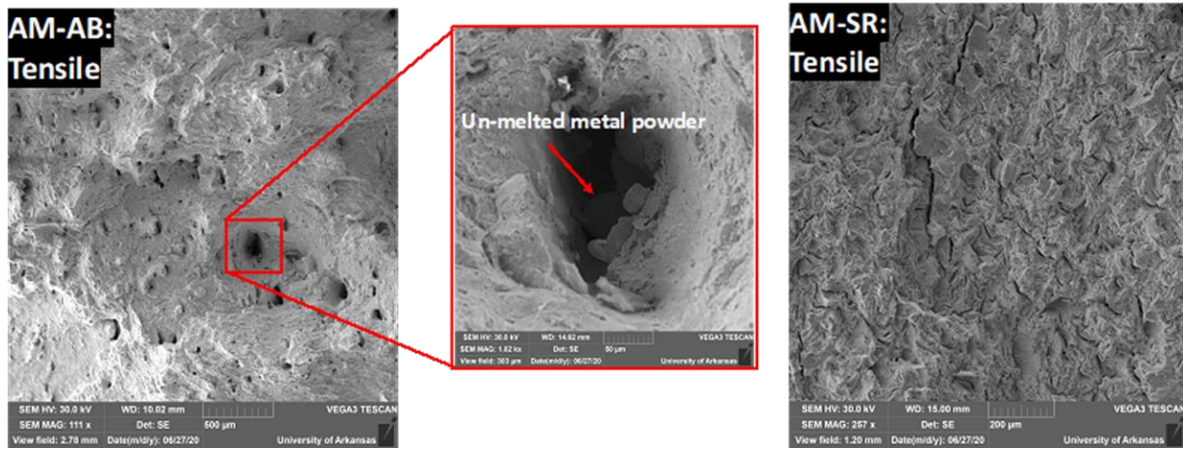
Tensile test fracture surface for AM 17-4 PH in both conditions
